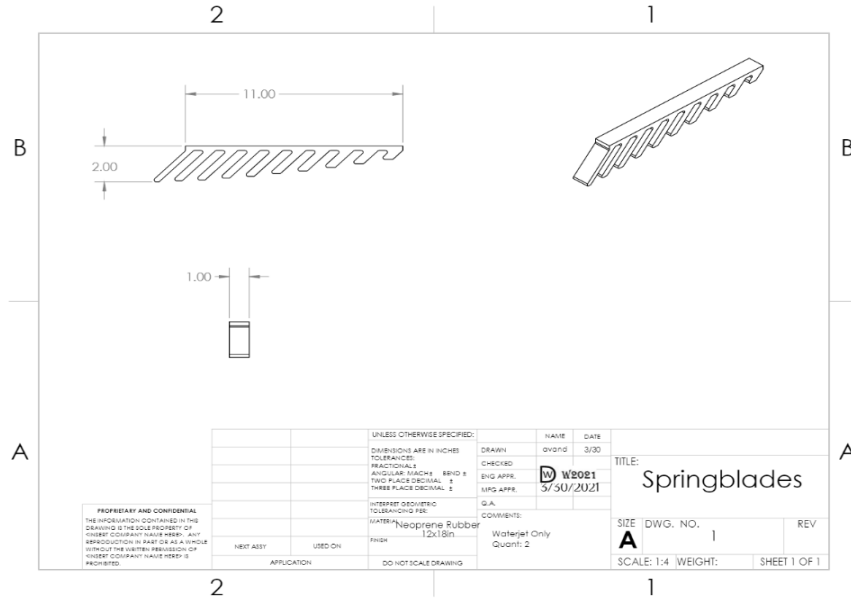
This is the manufacturing drawing for the Springblade prototype. Because the rubber was only 1in thick, two were cut using the waterjet and then glued together using E6000. The rubber had a Shore hardness value of 70A.
